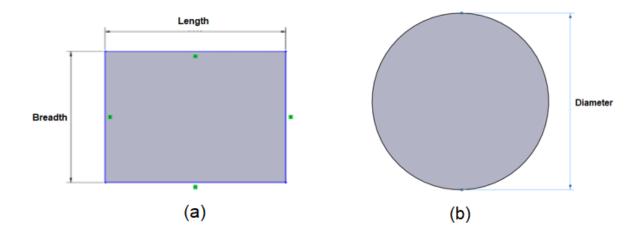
Types of blanks, (a) Rectangular blank, (b) Round blank.
